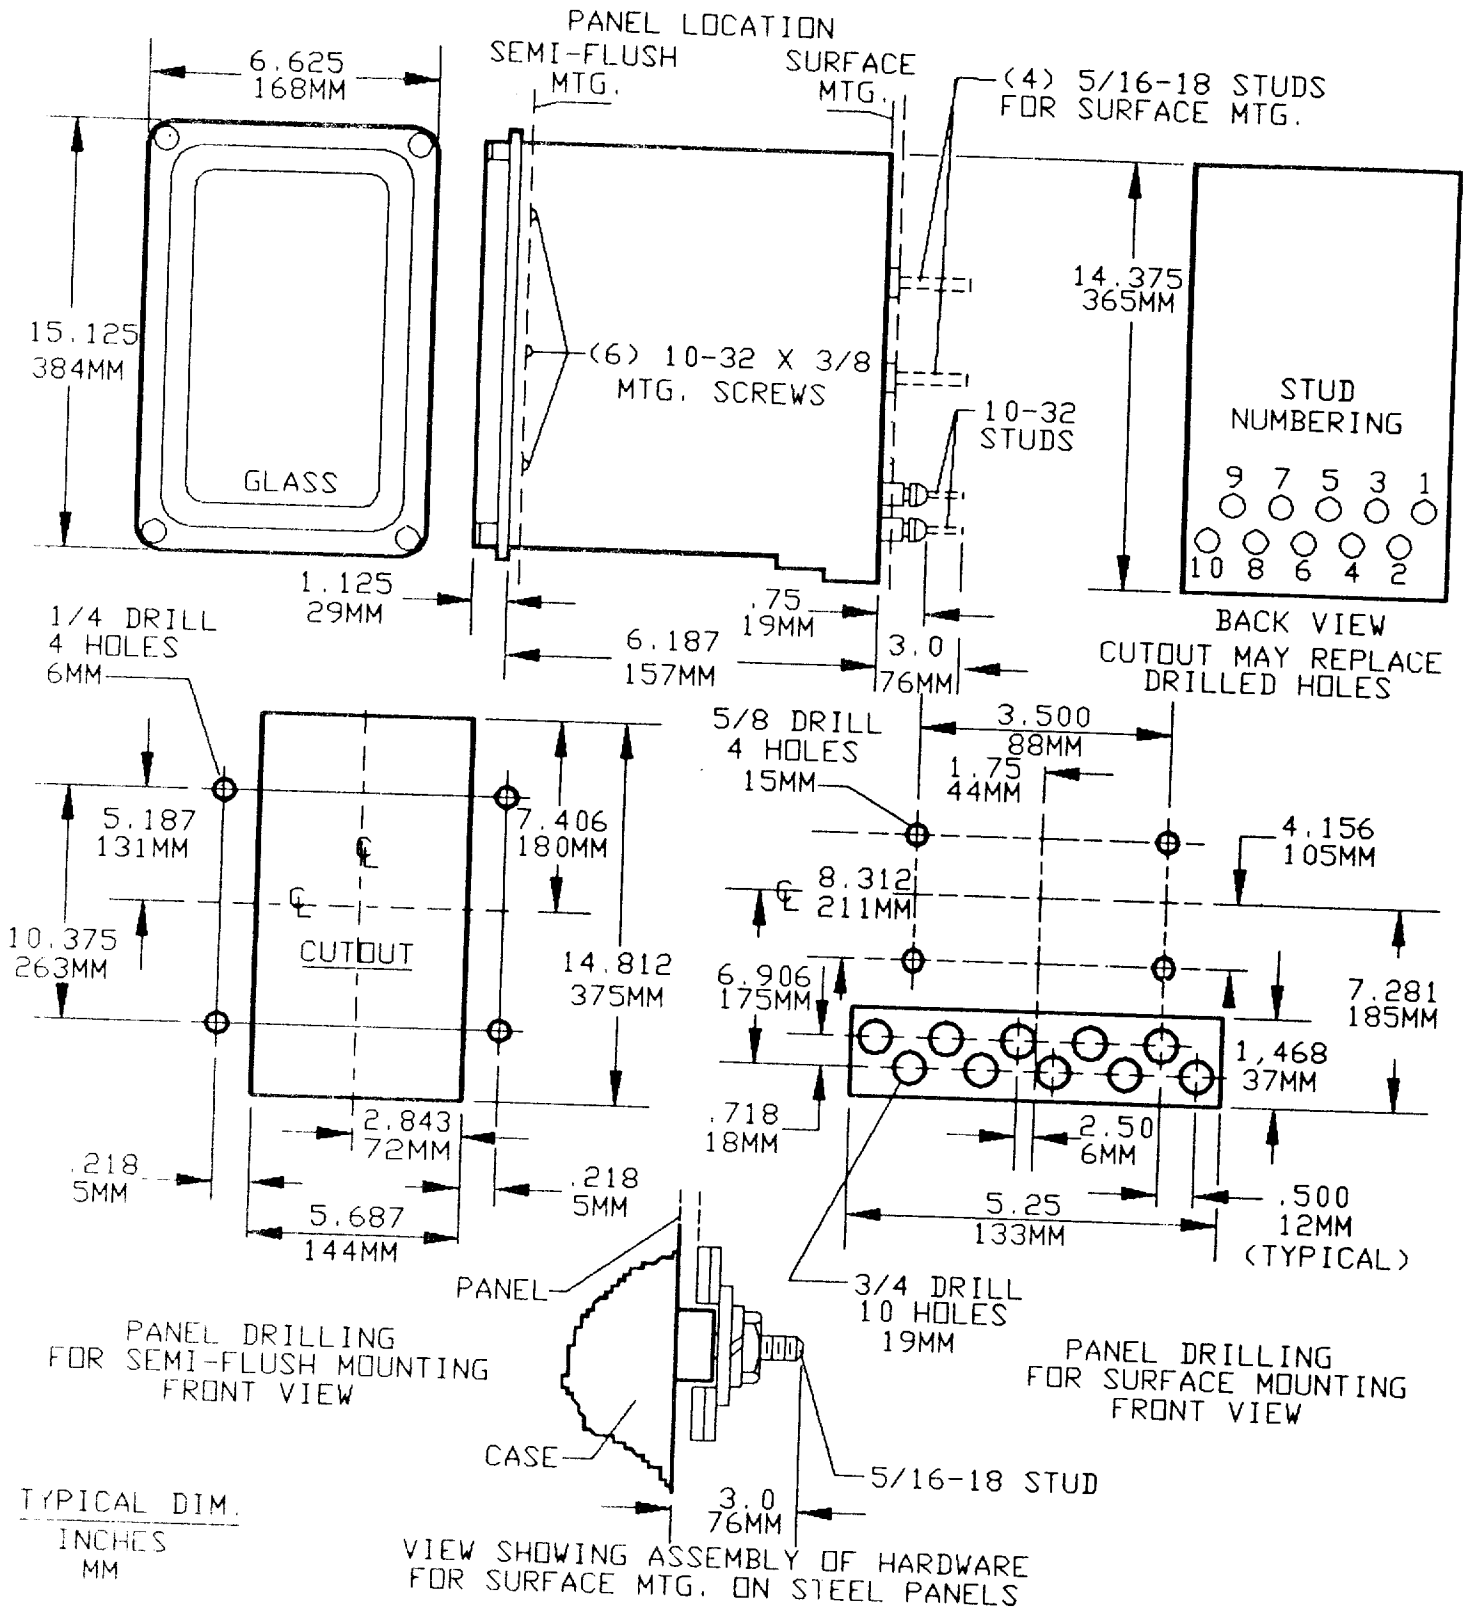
(6209273 (5)) Outline And Panel Drilling Dimensions For The CEY53A Relay
